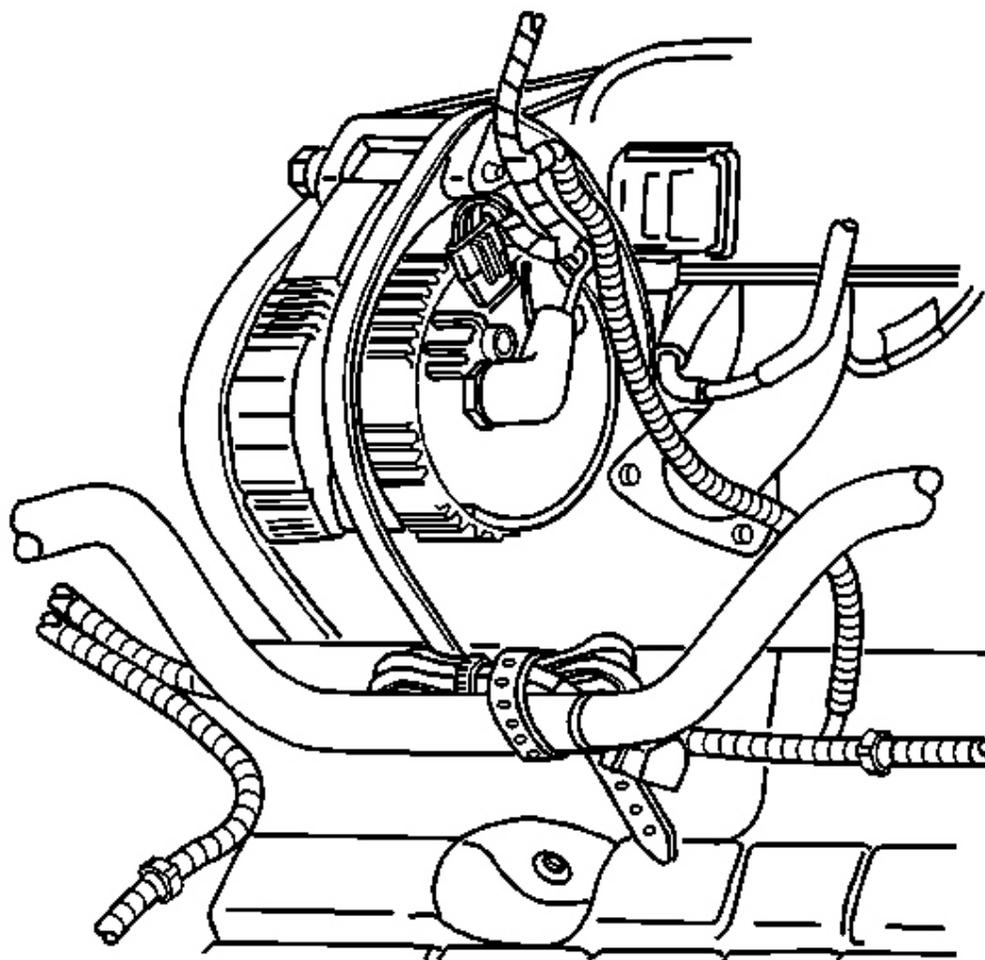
Engine Coolant Heater Cord & Secondary Air Injection Hose Pump With Strap
